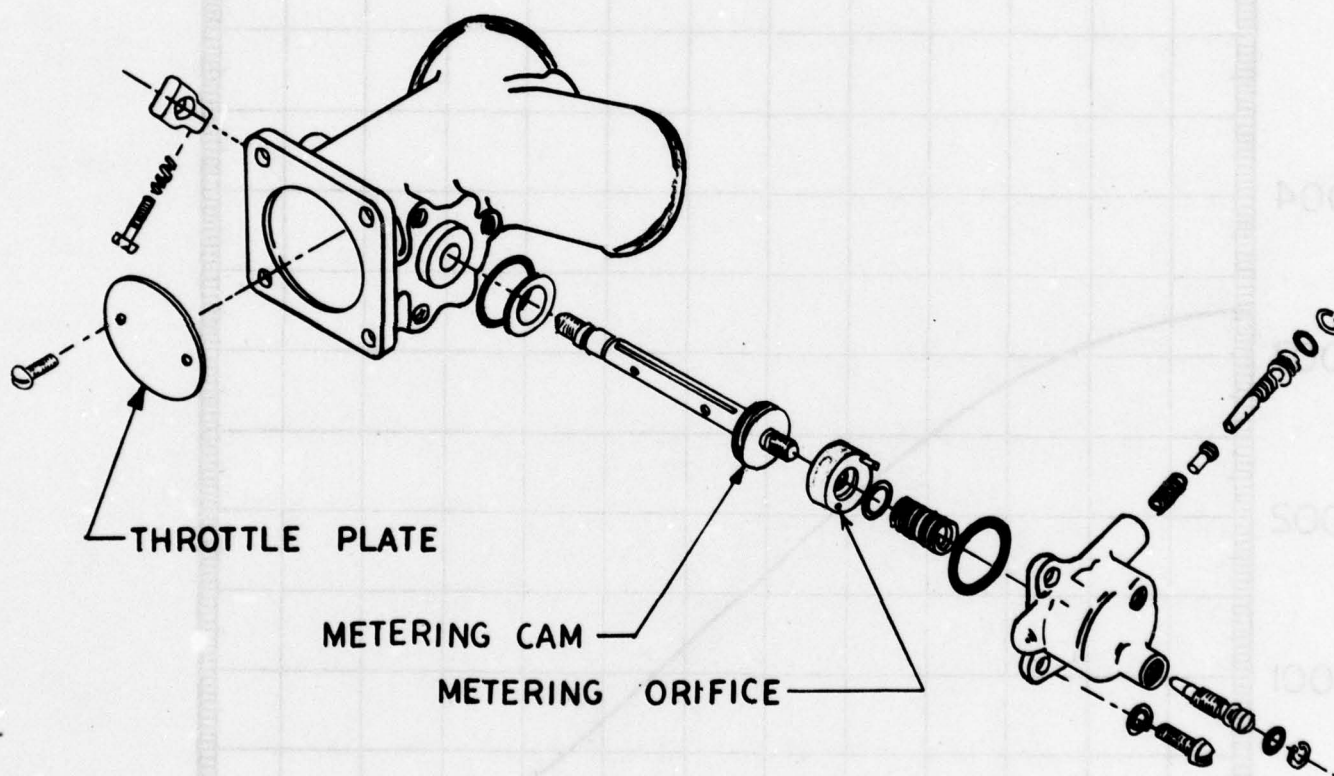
AIR THROTTLE AND FUEL METERING ASSEMBLY
